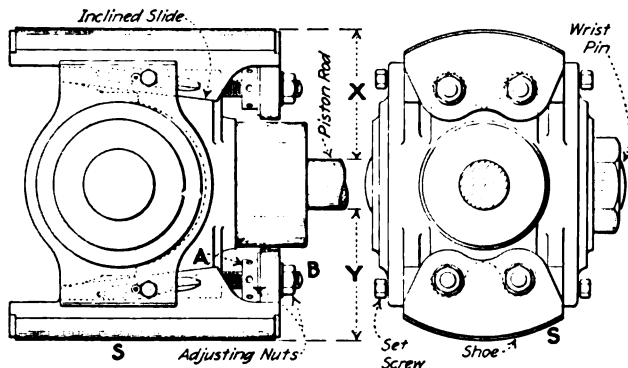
Illustrating method of adjusting crosshead shoes. To take up wear in the lower shoe, *S*, (which wears faster than the upper one) slack off on nuts, *A*, and tighten nuts *B*. When the adjustment is completed, the distances, *X* and *Y*, should be equal, unless the guide itself is worn.
